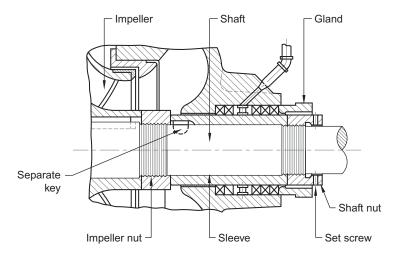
Shaft sleeve for pumps with overhung-impeller hubs extending into the stuffing box.
